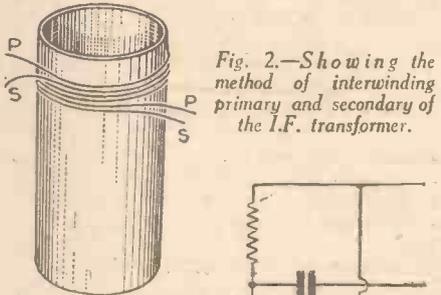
Showing the method of interwinding primary and secondary of the I.F. transformer.
